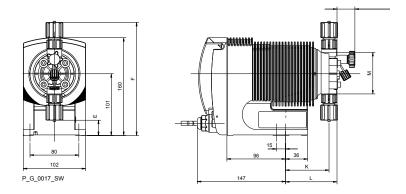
Dimension drawing gamma/ L, material version PVDF - dimensions in mm
